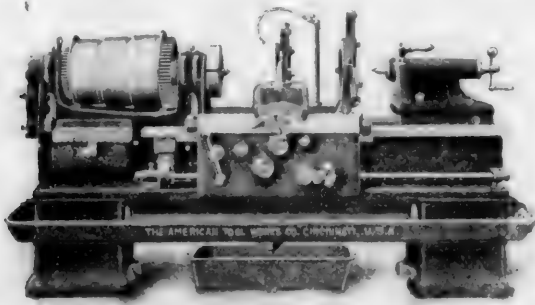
18-IN. HIGH-SPEED MANUFACTURING LATHE.
